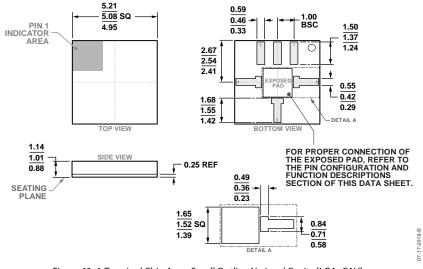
6-Terminal Chip Array Small Outline No Lead Cavity [LGA\_CAV] 5.08 mm × 5.08 mm Body and 1.01 mm Package Height (CE-6-3) Dimensions shown in millimeters
